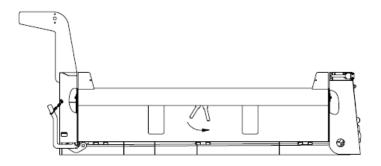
ROTATE SIDE DOOR HANDLE TO EXTEND LINKAGE PINS
